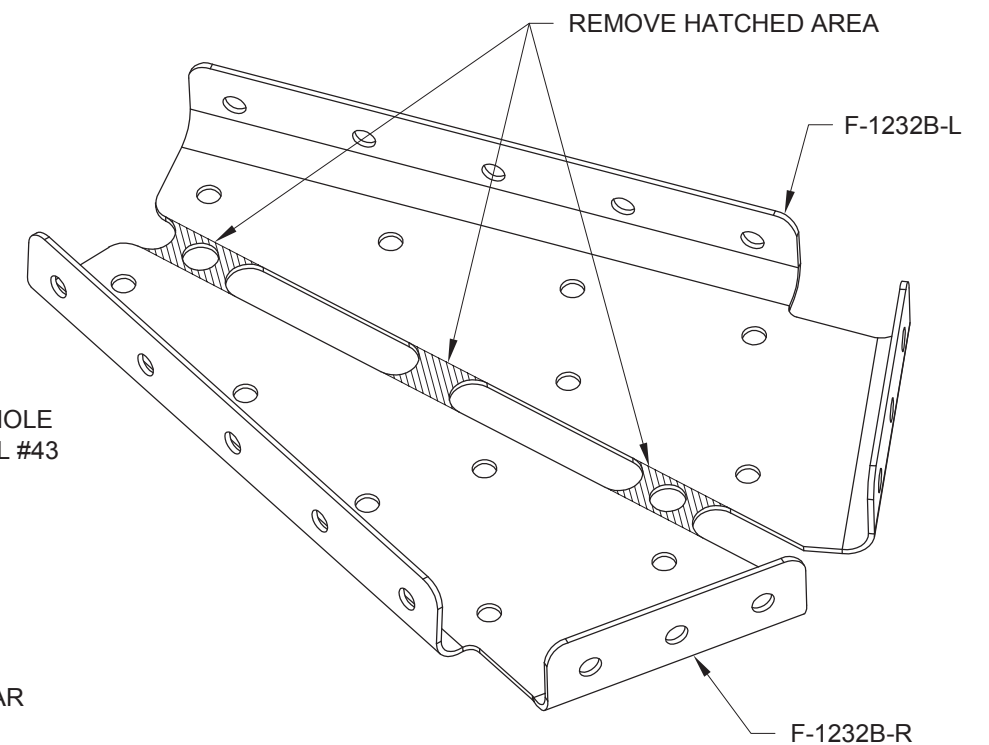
BREAKING APART THE ROLL BAR BRACE BRACKETS
